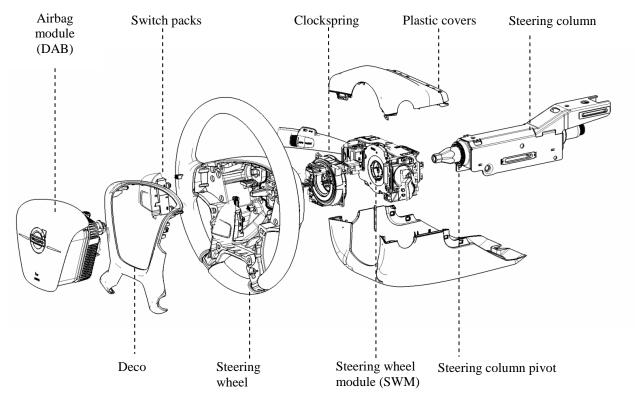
The steering wheel assembly illustrated in an exploded view with the names of the included parts.
